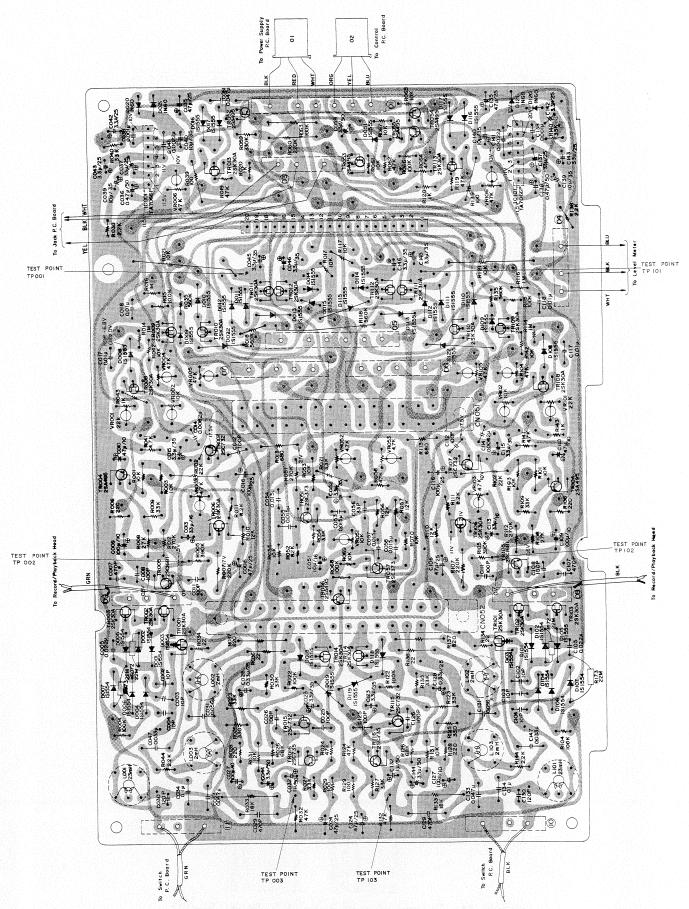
Bottom View of Pre-amplifier P.C. Board, PC-001
